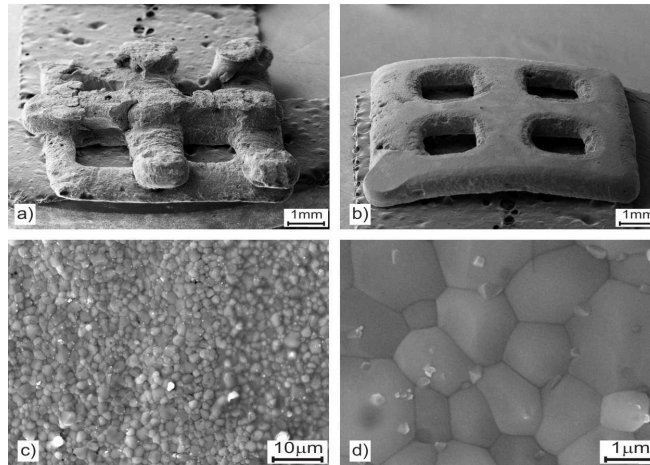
Three-dimensional parts prototyped and sintered at 1300 °C during 2 h, a) and b) prototyped three-dimensional parts, c) and d) microstructure on lower and higher magnification scale, respectively.
